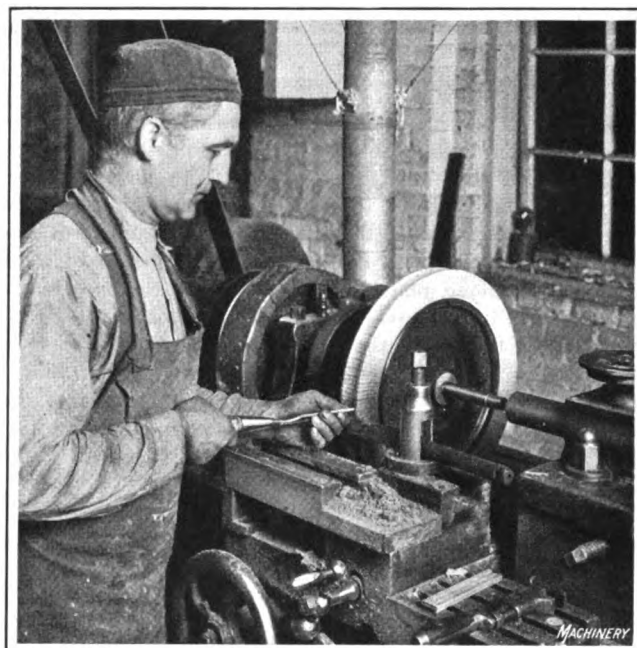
Forming a Concave Face on a Leather Compress Wheel
